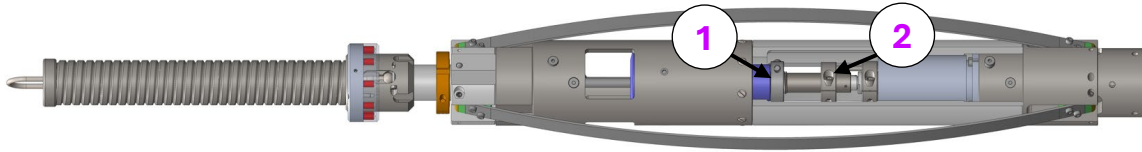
Anti-torque assembly. (1) Cablehead retaining nut. (2) Slip ring clamp collar.
